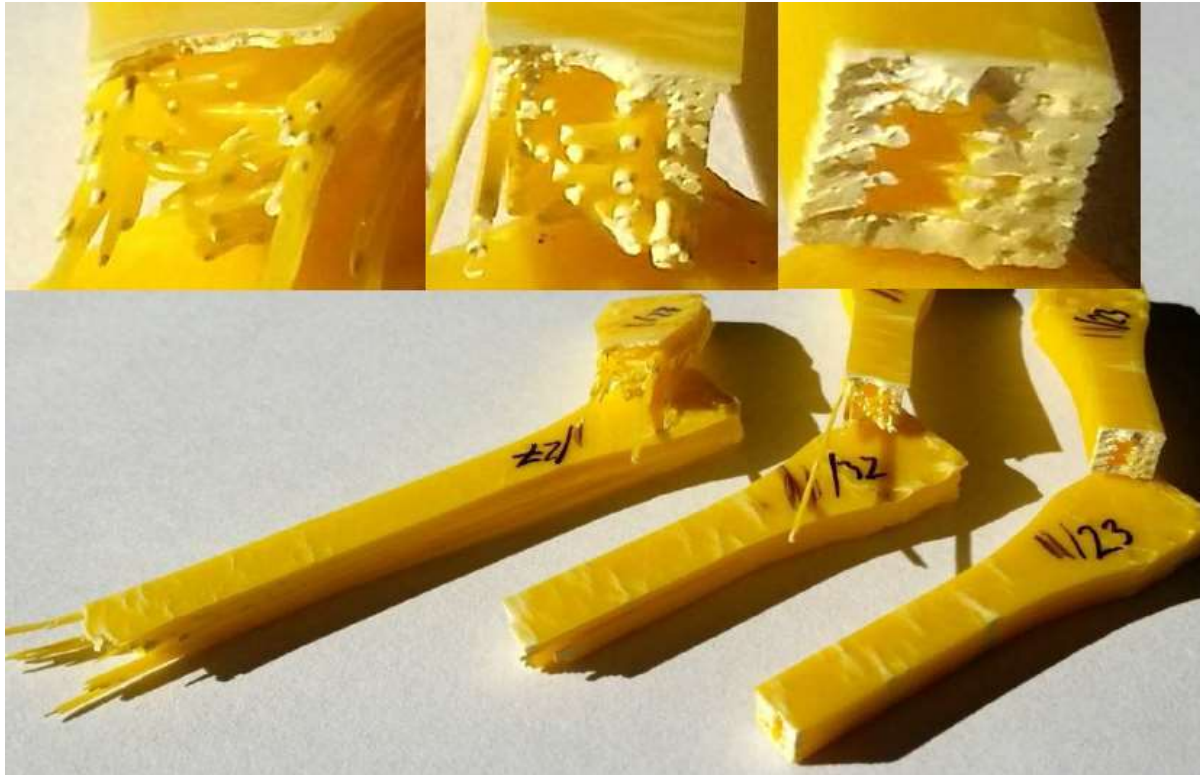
Cross-sections of p27, p33 and p23 specimens, threads/fibres of material visible in p27.
